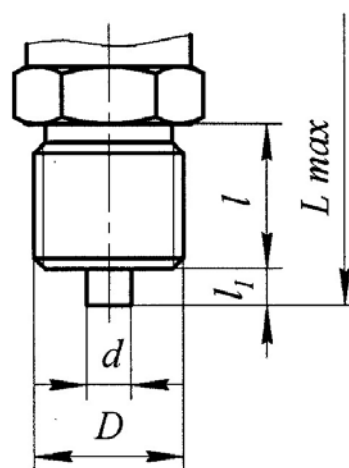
Overall and attachment dimensions for transducers with M12x1.5 coupling thread
